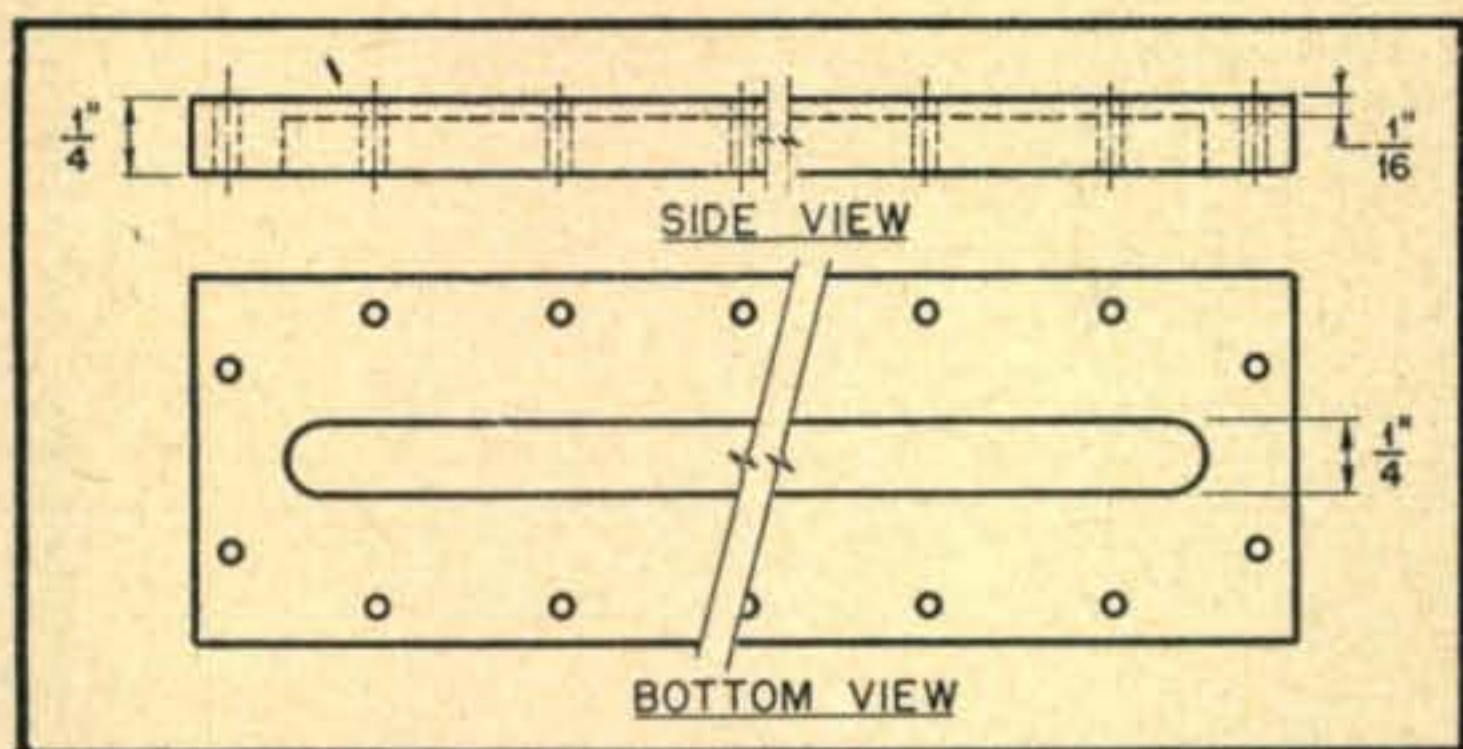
Milled plate for hinge cover requiring some machine shop facilities.
